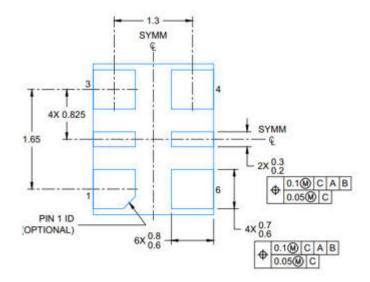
LMK6D/P/H Oscillator in 6-Pin, 2.5-mm × 2.0-mm DLF Package
